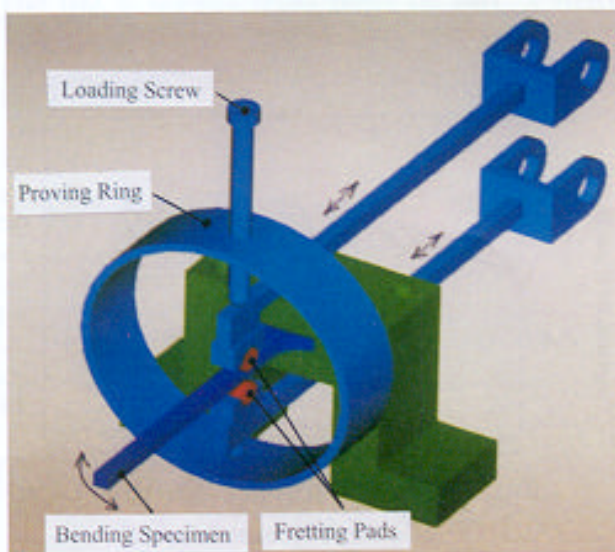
Model of the fretting pad and specimen assembly used in the set up.
